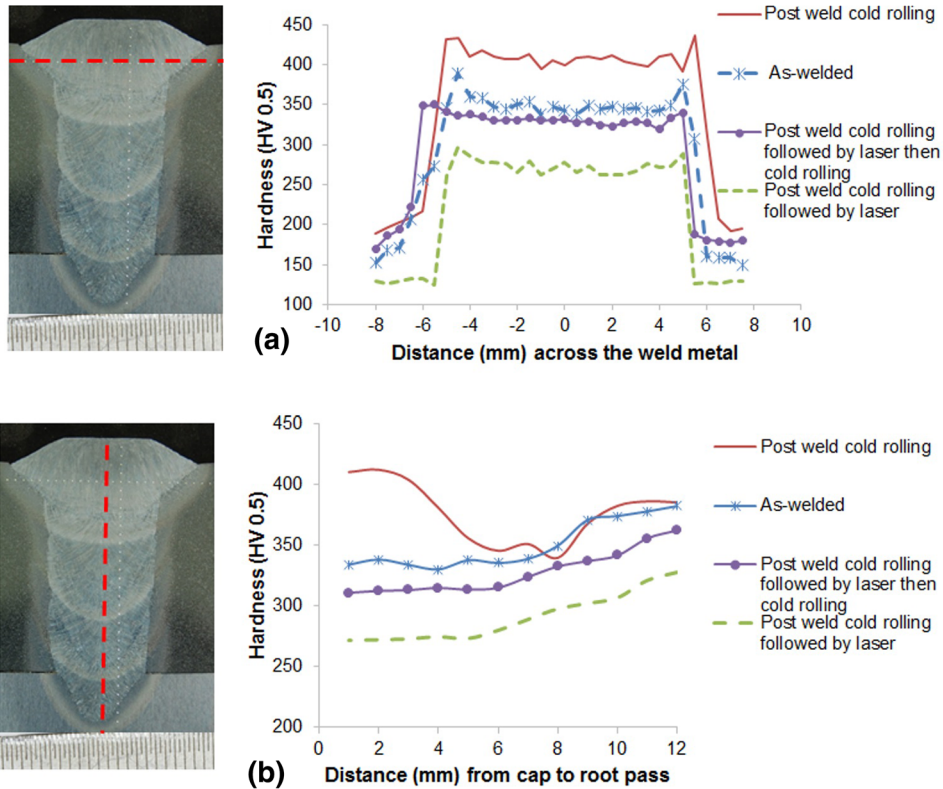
Showing the hardness profile (a) across the weld metal (b) along the weld metal
